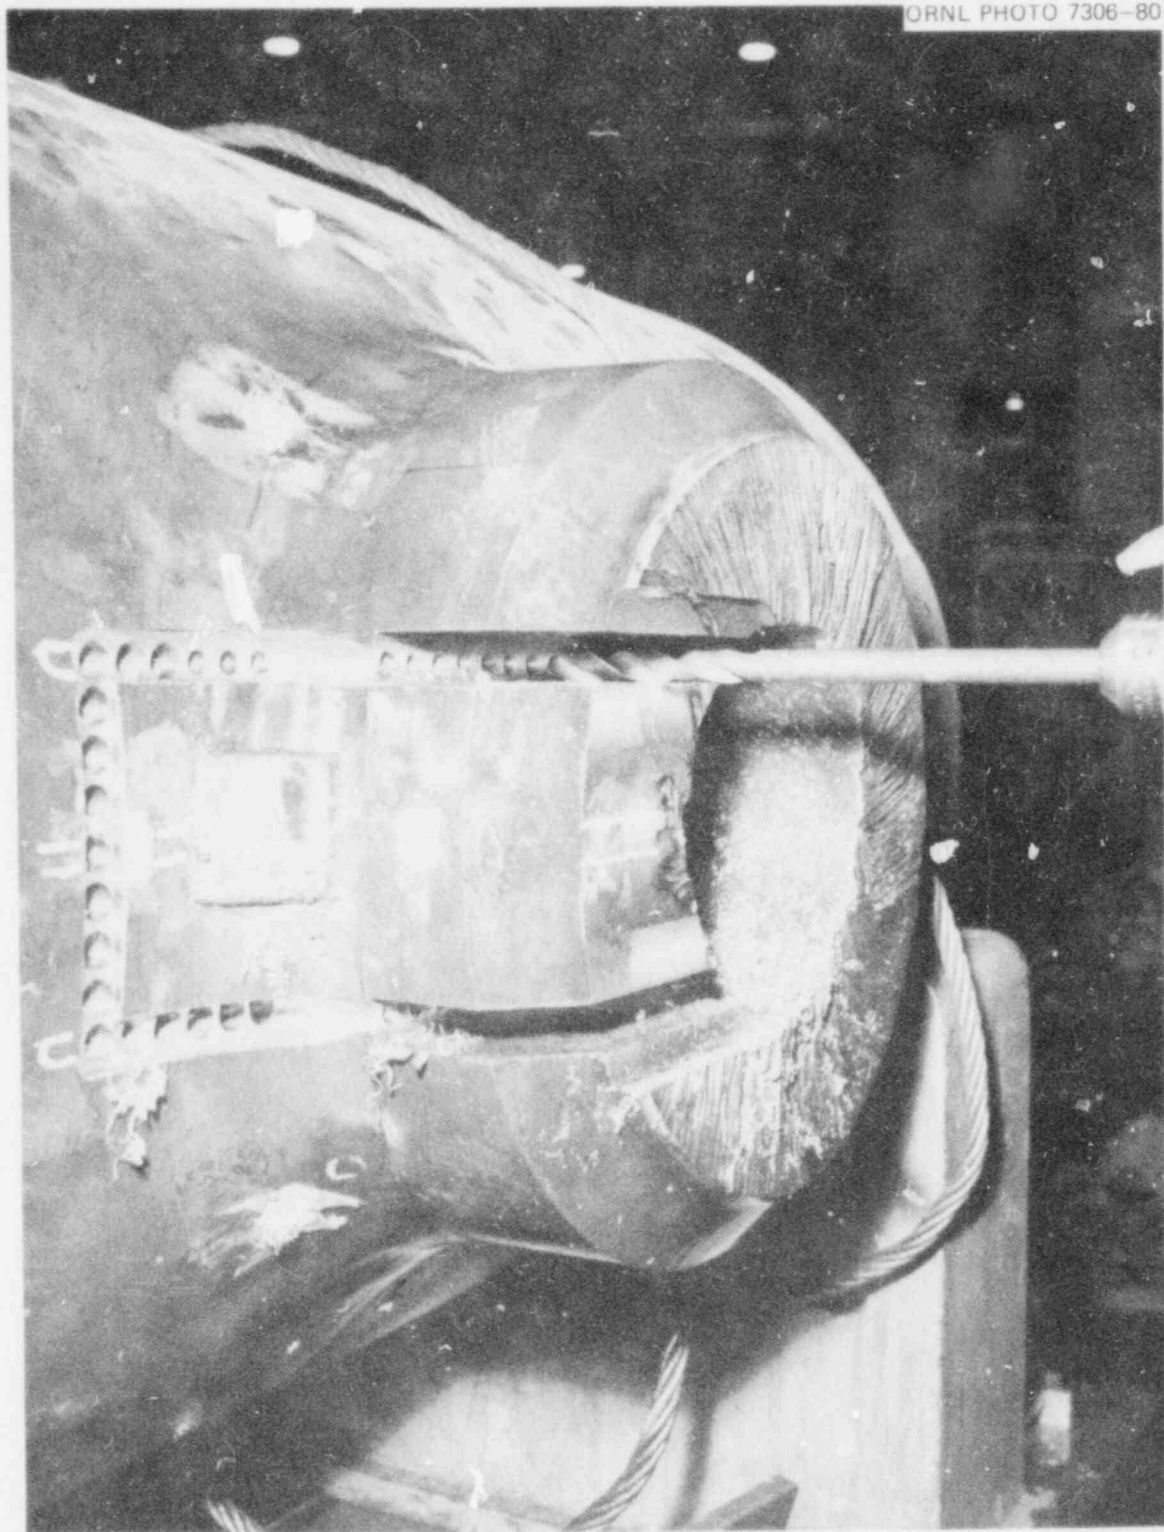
Drill and mill machining to remove the vessel V-5 specimen containing the flawed region. Vessel is located on a vertical boring mill.
